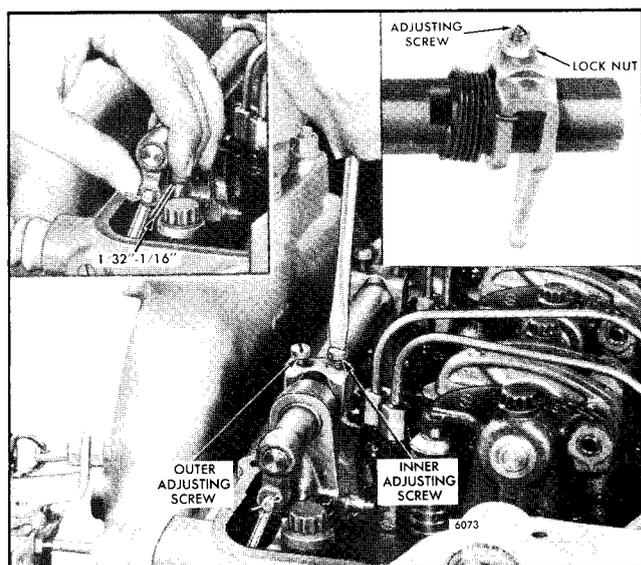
Adjusting Injector Rack Control Lever Adjusting Screws
